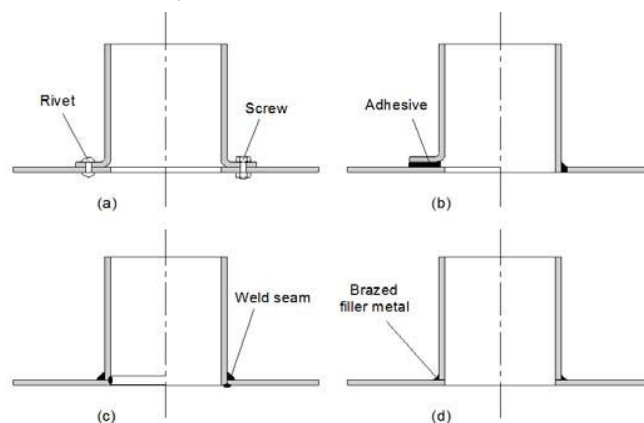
Conventional tube-sheet joints obtained by means of (a) fasteners, (b) adhesives, (c) welding and (d) brazing. (Alves, Silva, and Martins 2015)
